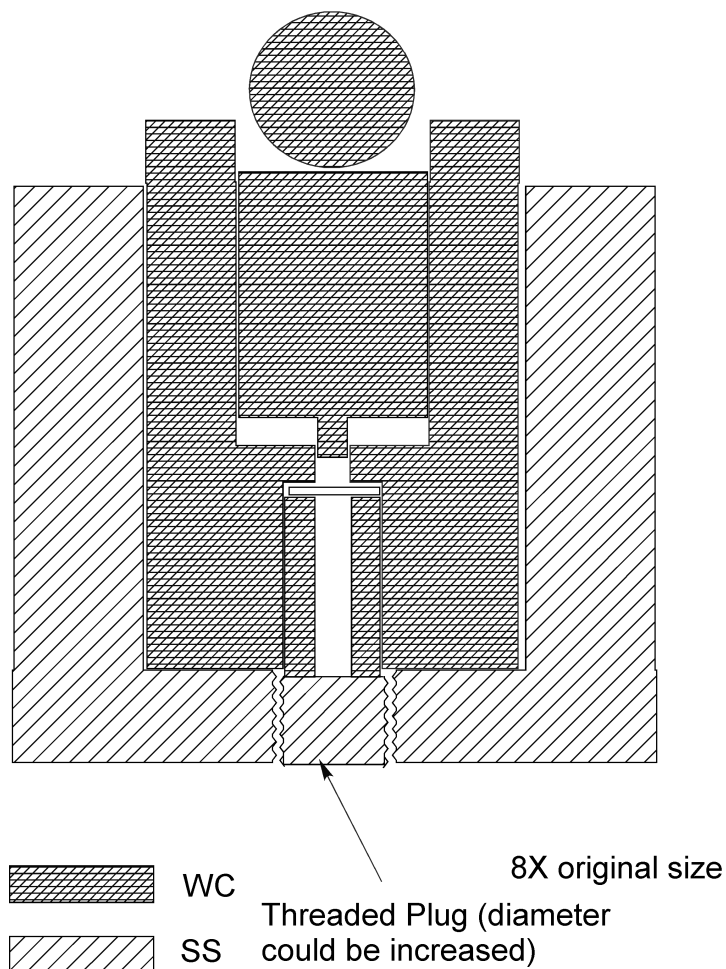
Schematic of Shear Punch Test fixture for 3mm x 0.25mm TEM samples using a 1mm punch.
